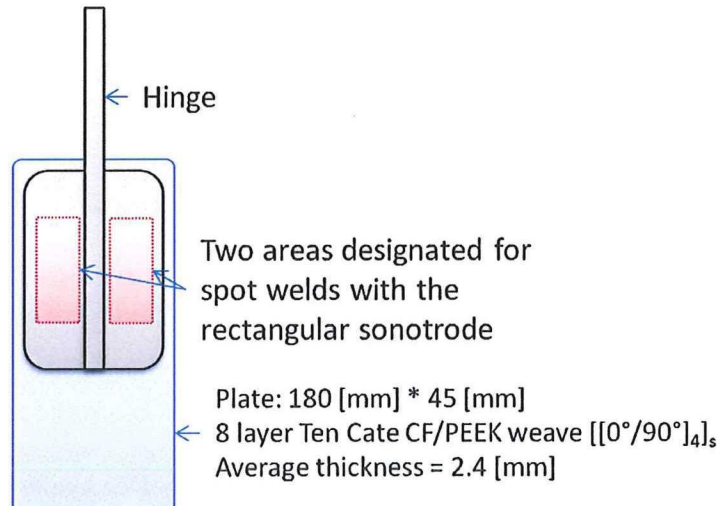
| Schematic view of the sequential spot weld configuration used showing plate dimensions (manufacturing process is described in section 2.1.2)
